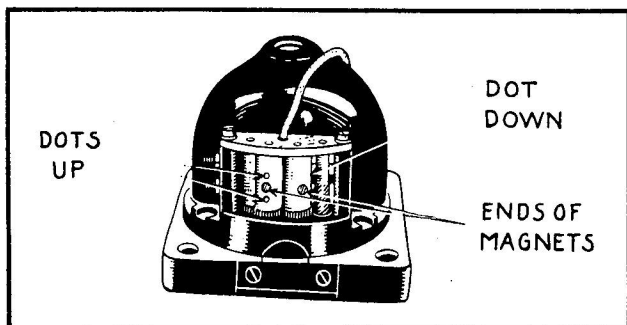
Positions of N-S Magnet Gear Assemblies
